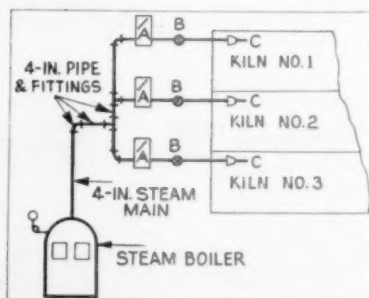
Diagram showing changes to make in steam piping to secure satisfactory curing. (A) Steam temperature modulating valves, (B) Steam shutoff valves, (C) On end of 2-in. pipe, mount a 2- x 1 1/4-in. reducing coupling, screw 1 1/4-in. shoulder nipple in outlet of coupling
